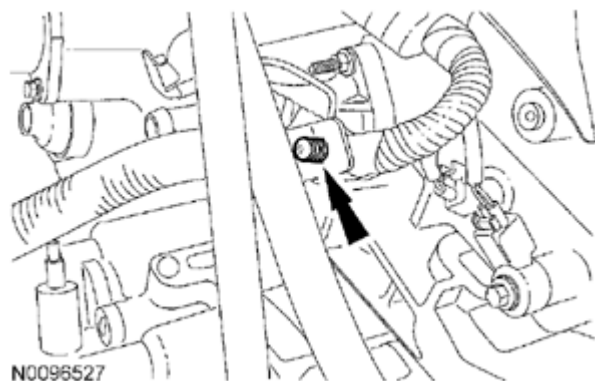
Locating Wiring Harness Retainer Of Transmission Indicator Tube
